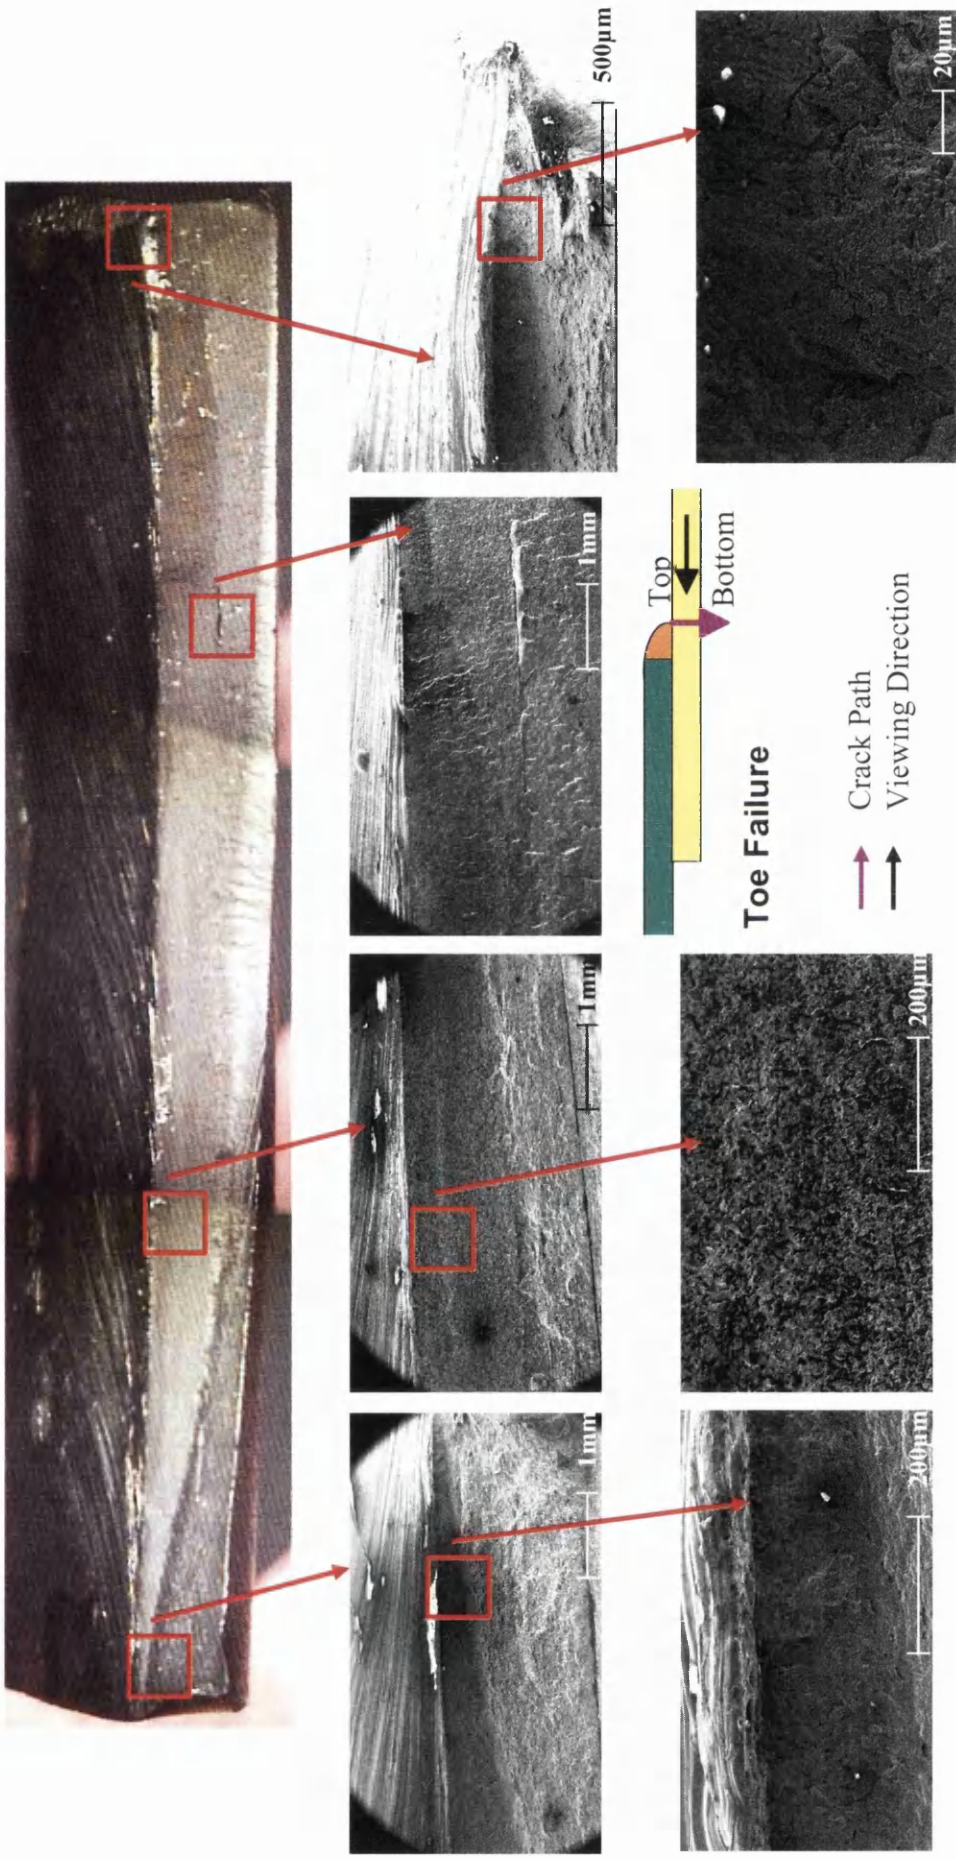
Typical Fracture Surface for TM11B Weld Toe Failure – Weld View
